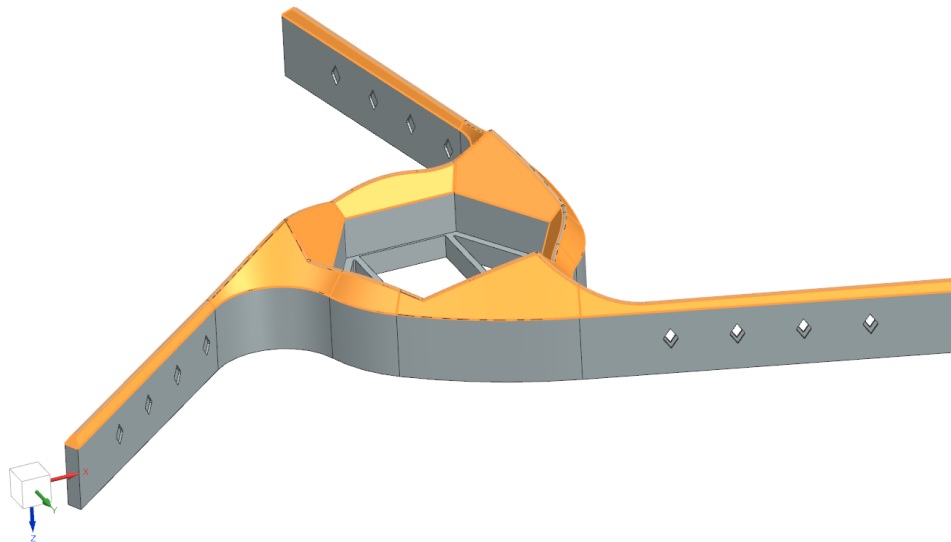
Angled Extrusion Added to Bottom of Model to Make it Printable Using Powder Bed Fusion.
